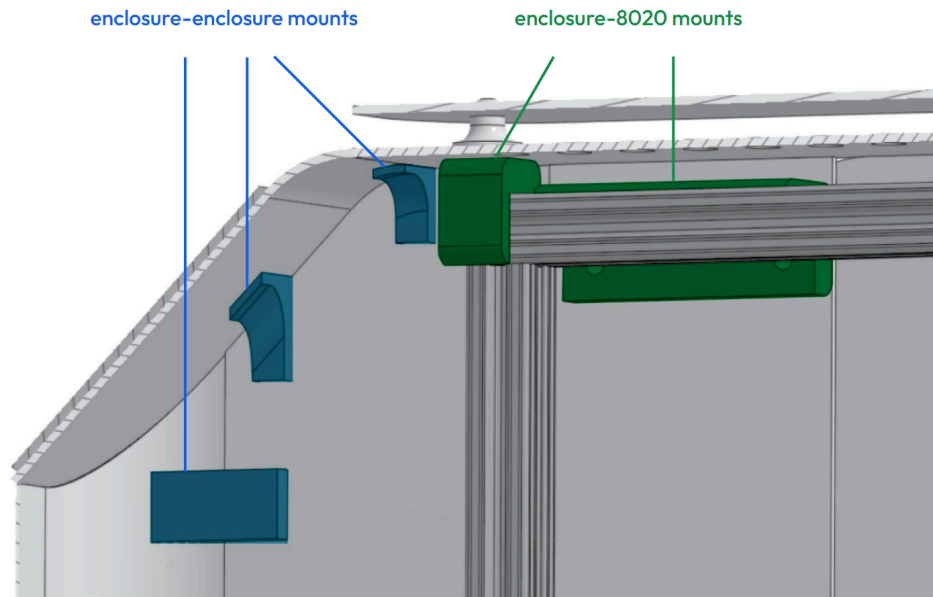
enclosure-enclosure mounts and enclosure 8020 mounts shown on CAD section view
